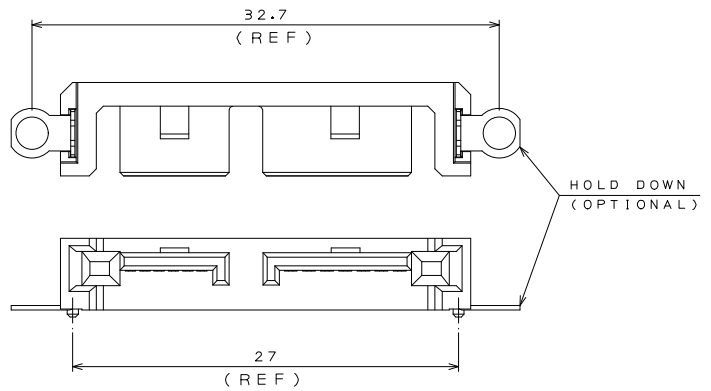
7.0 mm Slimline device plug connector interface dimensions optional hold down mounting
